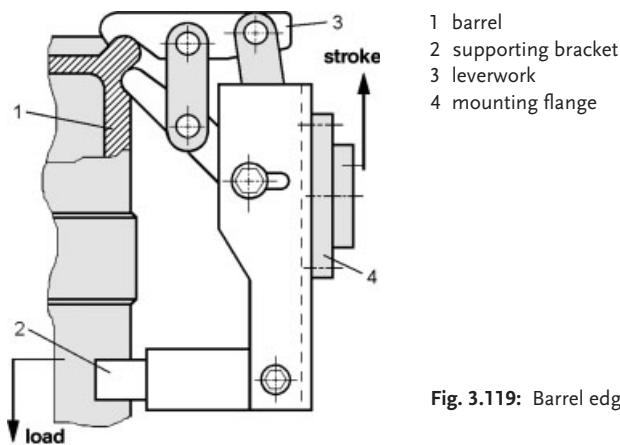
Barrel edge gripper (*P&D Systemtechnik*)
